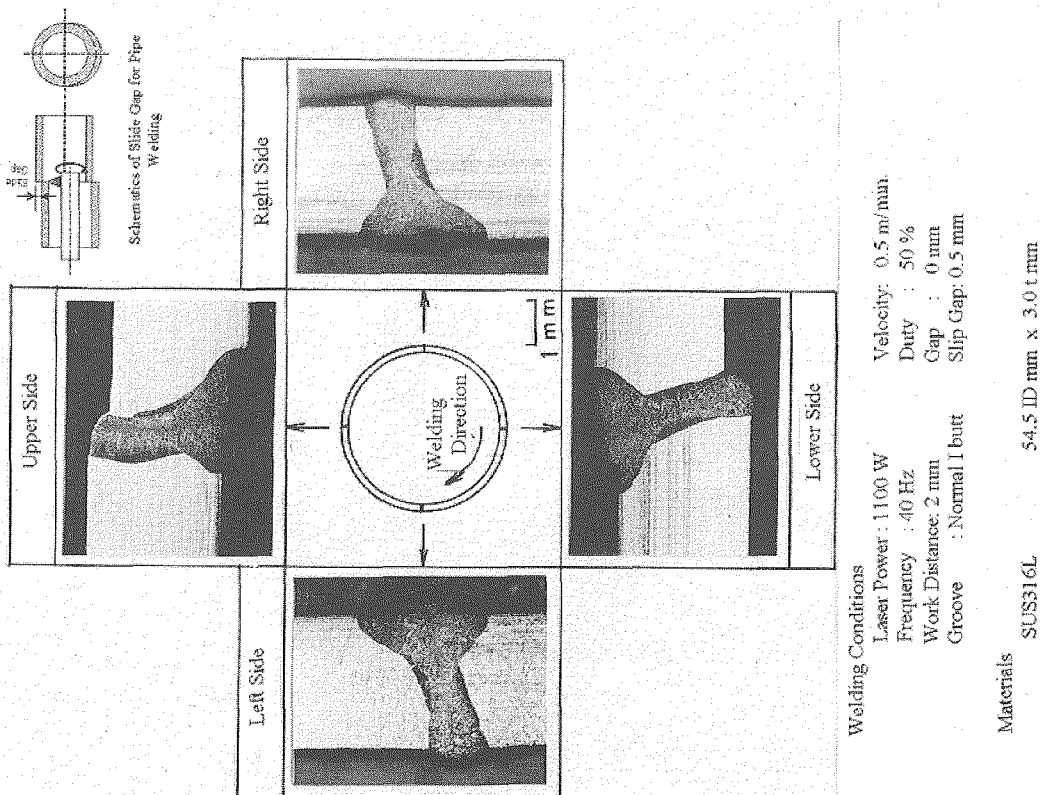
Cross section of the weld joint made by Laser Beam with 0.5mm Slip Gap
